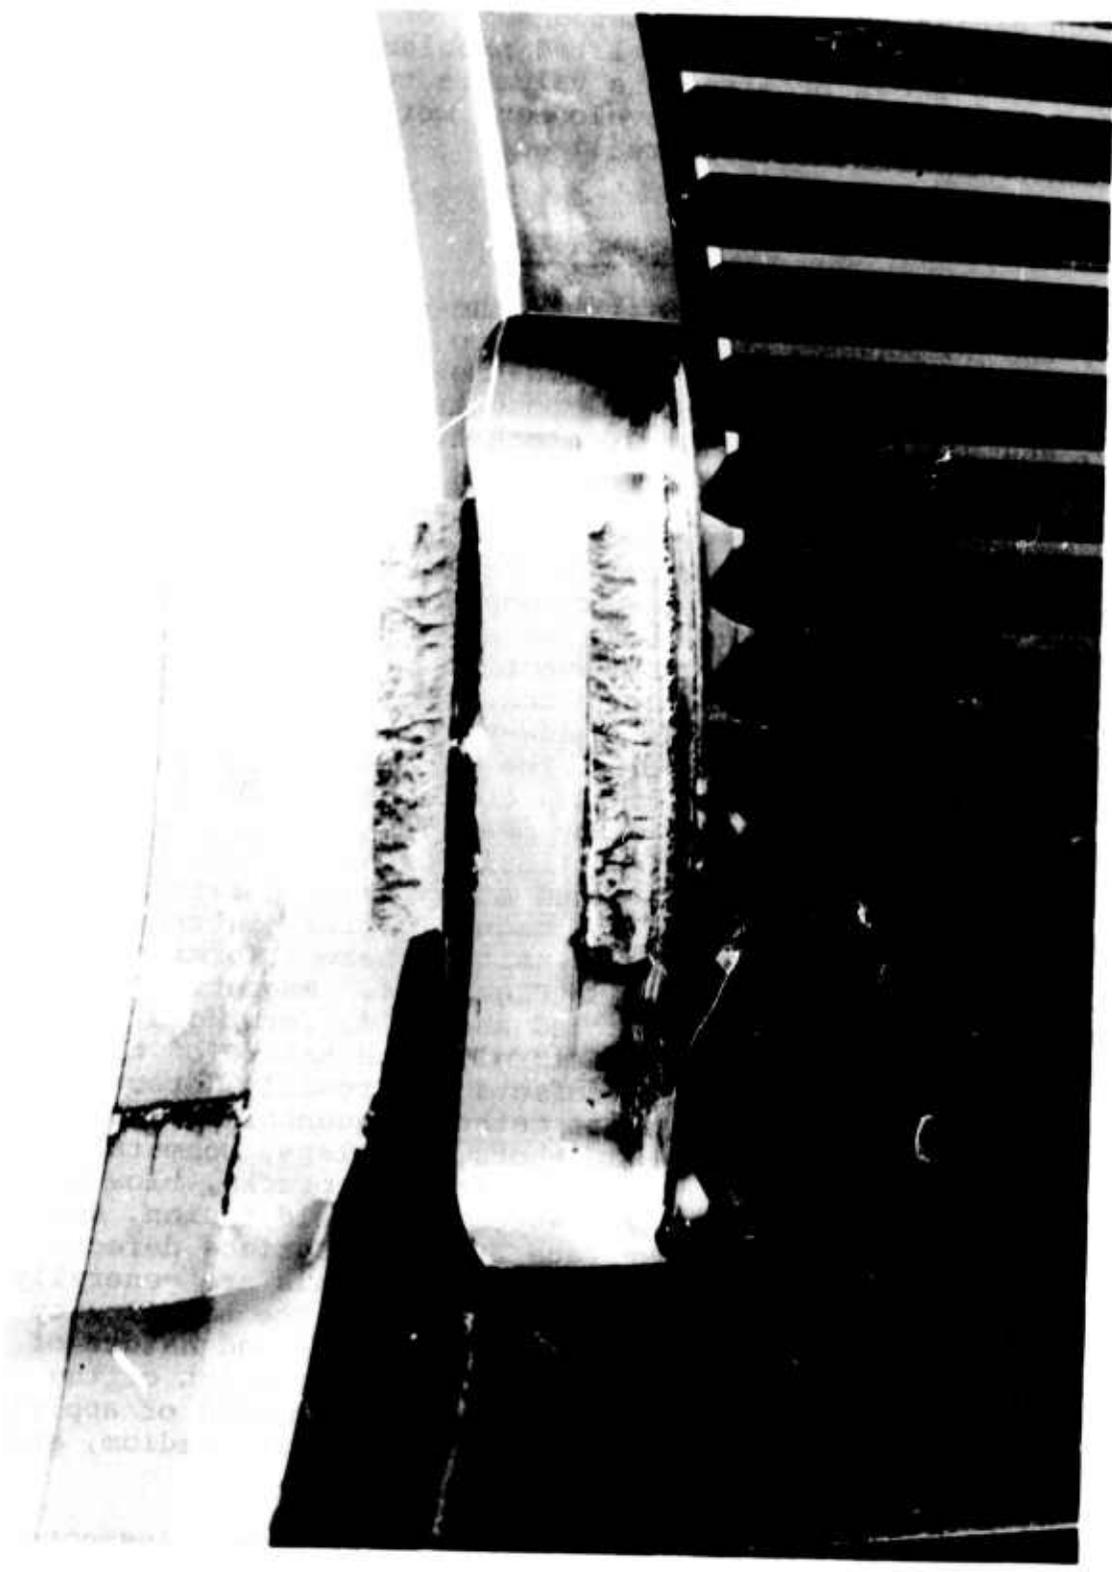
Second-Row Pinion Lower Roller Weld Cracking.
